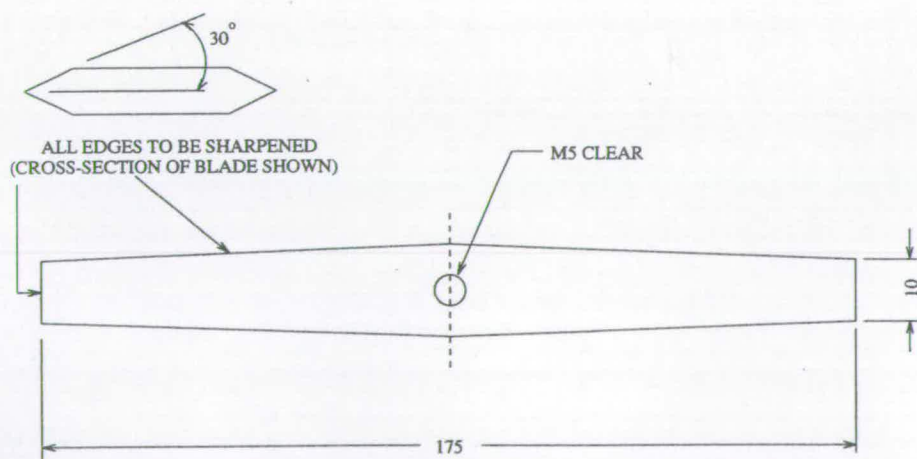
(ii) Dimensions of the flat-plate blades.
